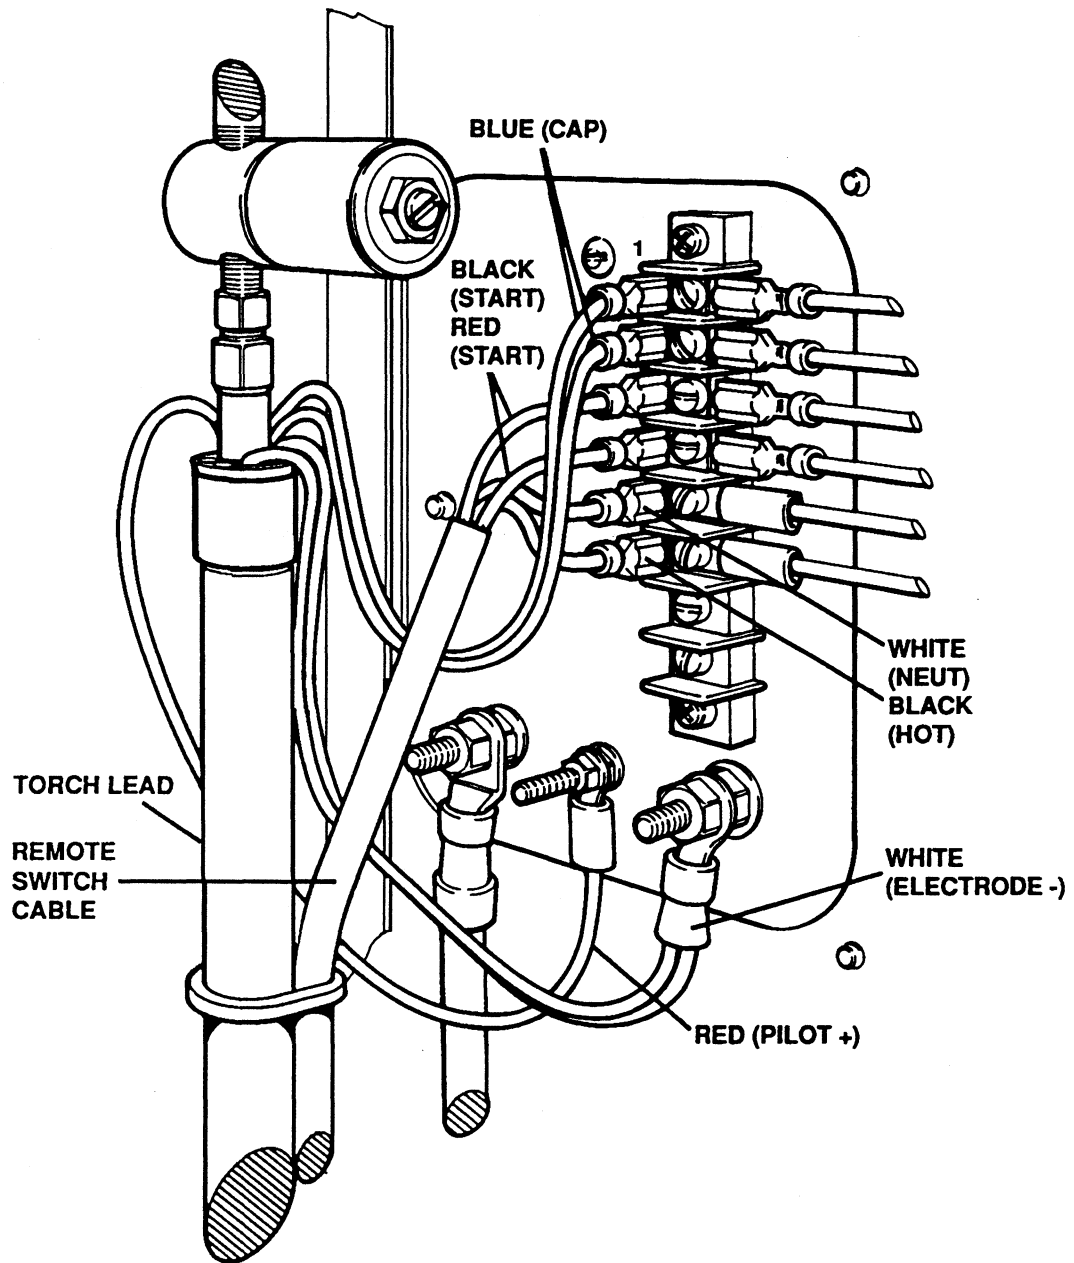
Machine Torch Lead and Remote Switch Connections
